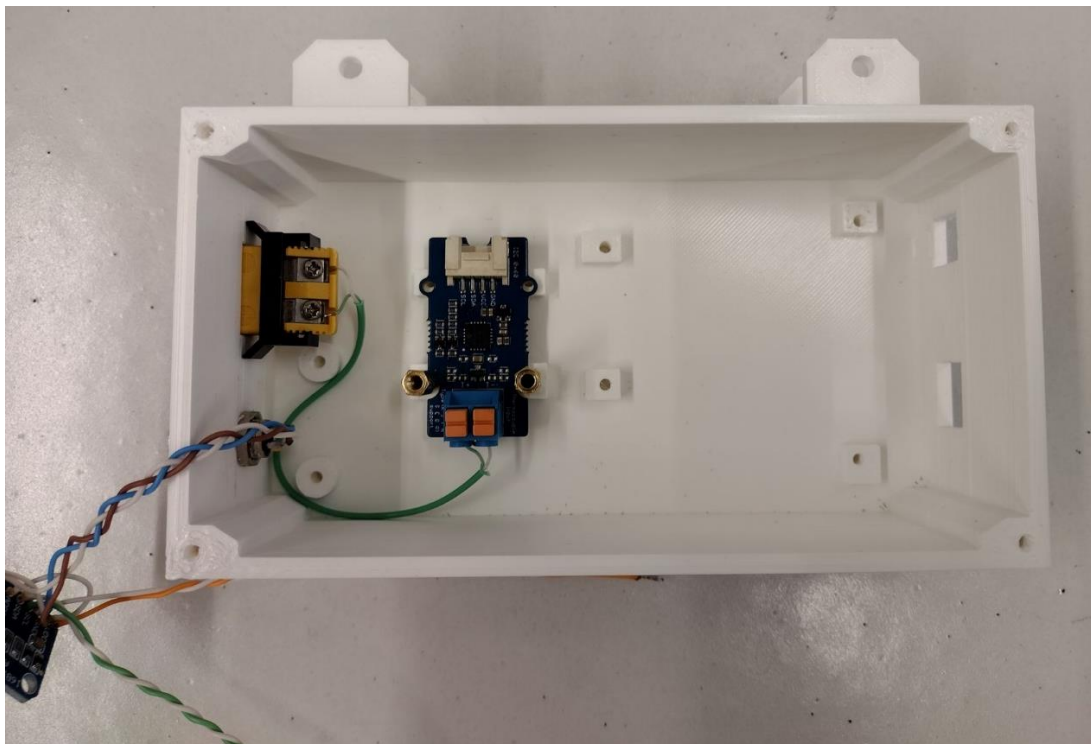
The assembly begins with the installation of the thermocouple socket and the MCP9600 board, followed by connecting them using a special thermocouple cable. It is important to ensure correct polarity, so attention should be paid to the color coding of the thermocouple wires (thermocouple wire color coding can be found in Internet). Afterward, the M8 connector for the pressure sensor is installed, with three wires (GND, +5V, and signal) pre-soldered to the connector. The next step involves soldering the necessary wires to the Arduino board (+5V, GND, SDA, SCL). At the same time, the universal PCB is prepared to facilitate the I²C connections. All interconnecting wires are prepared with a length longer than strictly required, which provides flexibility during the assembly process and allows for easier handling of the components.
